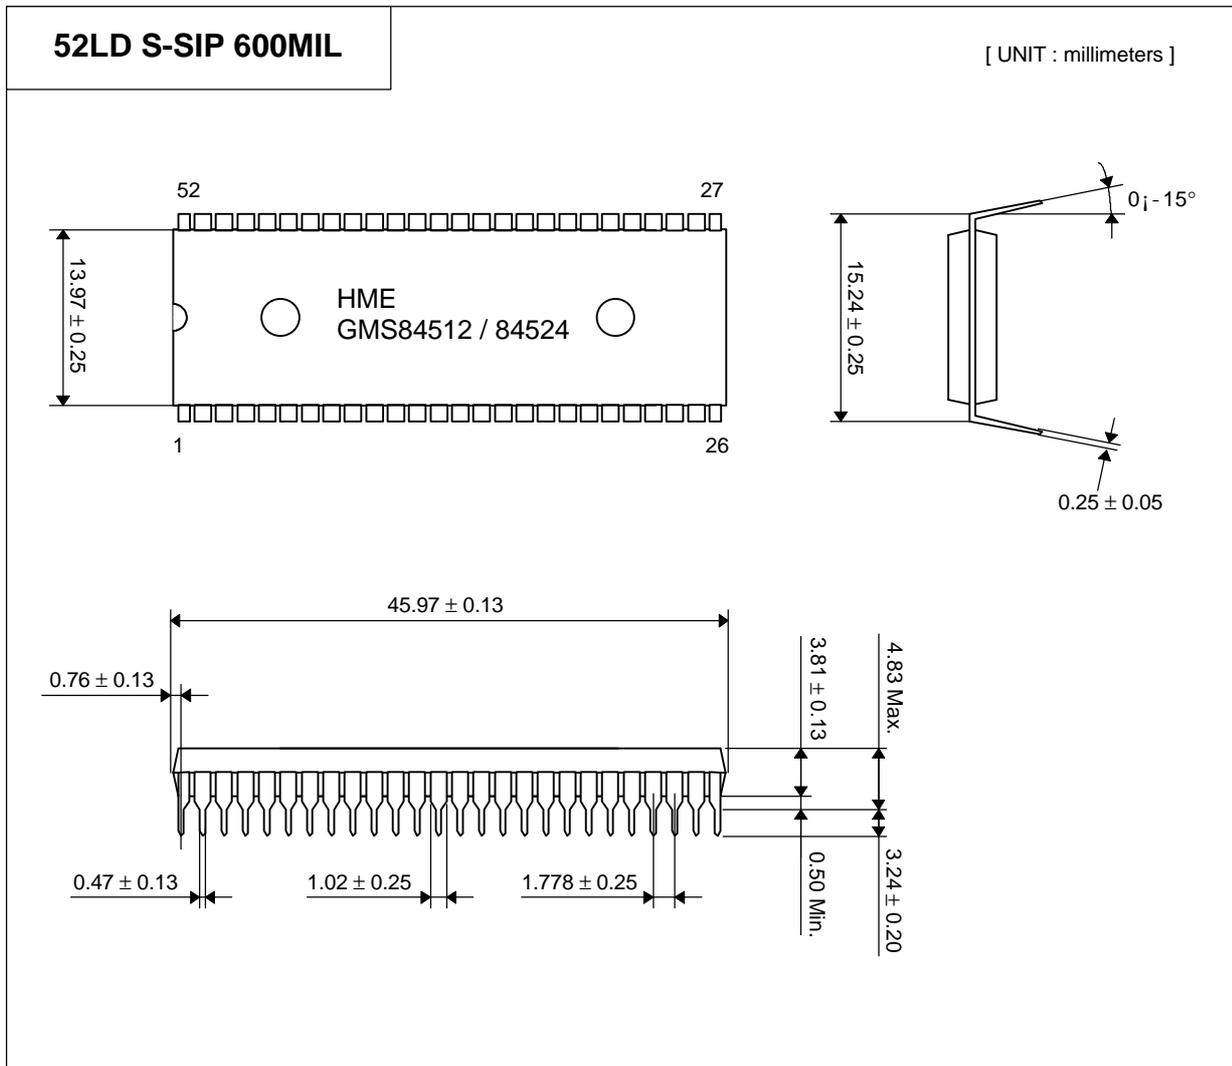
52-PIN S-DIP PACKAGE DIMENSION
